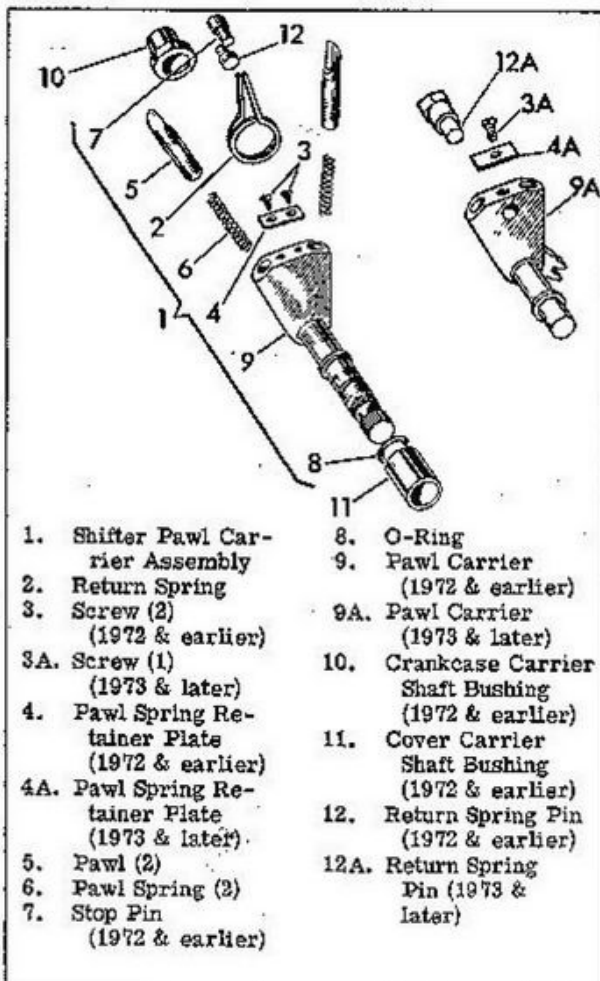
D-41. Shifter Pawl Carrier - Exploded View
